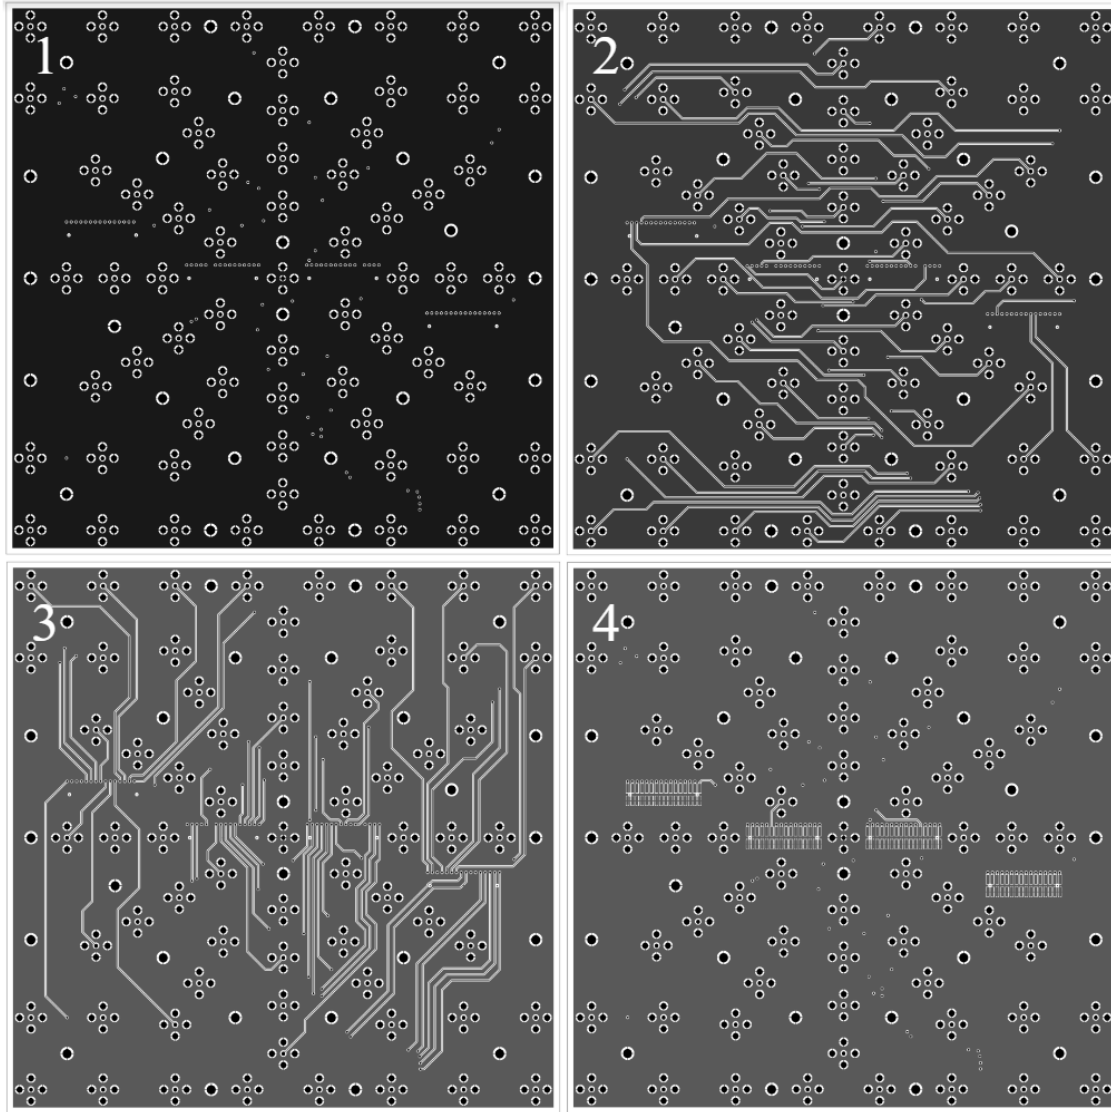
Four-layer circuit board designed in collaboration with Peter Yu (UCLA physics electronic shop) for the upgraded 66-port BNC channel terminal. Layers 1 to 4 are stacked and printed as one integrated PCB board.
